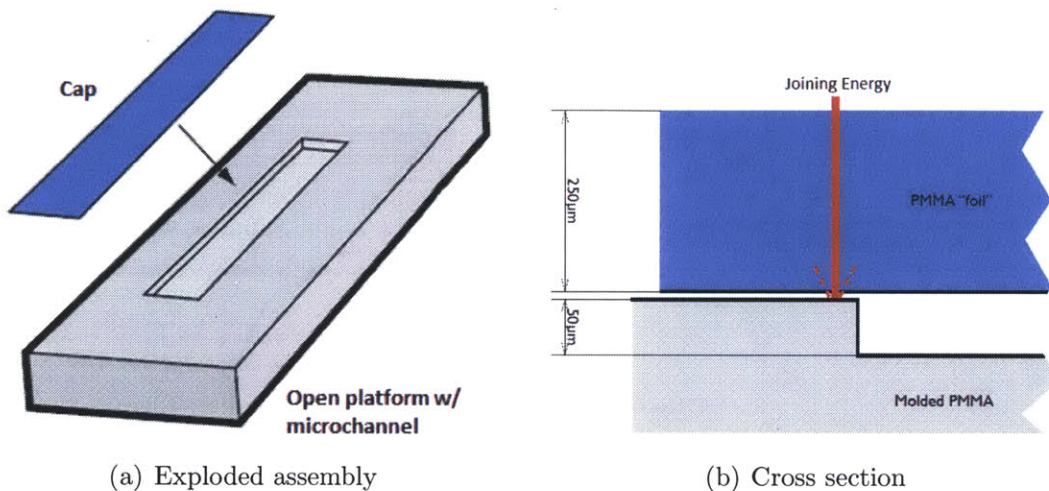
Conceptual exploded assembly that encloses the fluidic path and close up view of cuvette joining section
